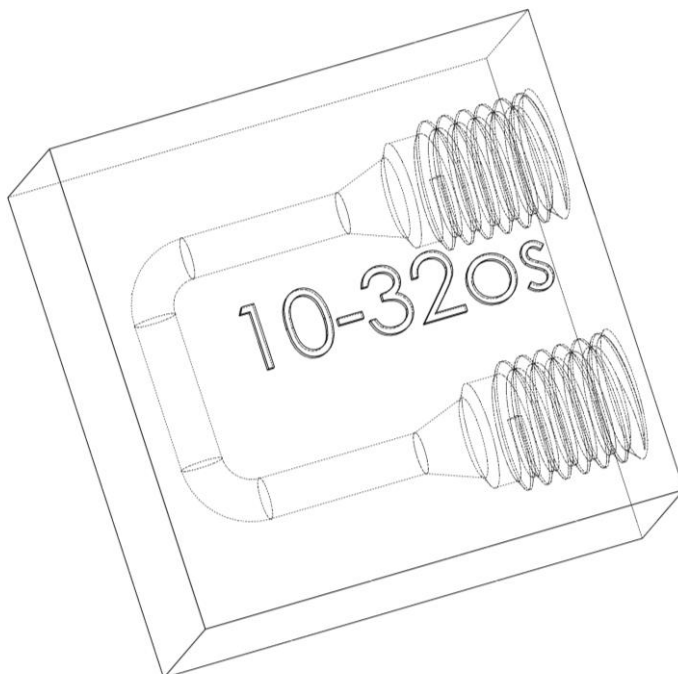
CAD model of microfluidic chip with female threaded 10-32 ferrule fittings for burst pressure testing. One end of the chip was blocked using a blank 10-32 fitting during testing.
